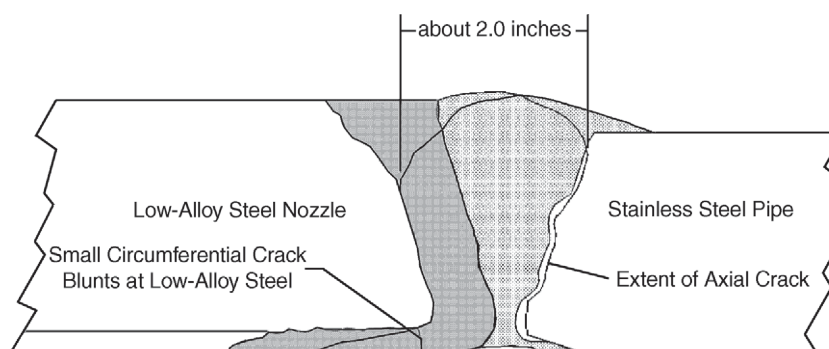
THROUGH-WALL CRACK AND PART-DEPTH CIRCUMFERENTIAL CRACK IN V.C. SUMMER REACTOR VESSEL HOT-LEG OUTLET NOZZLE
